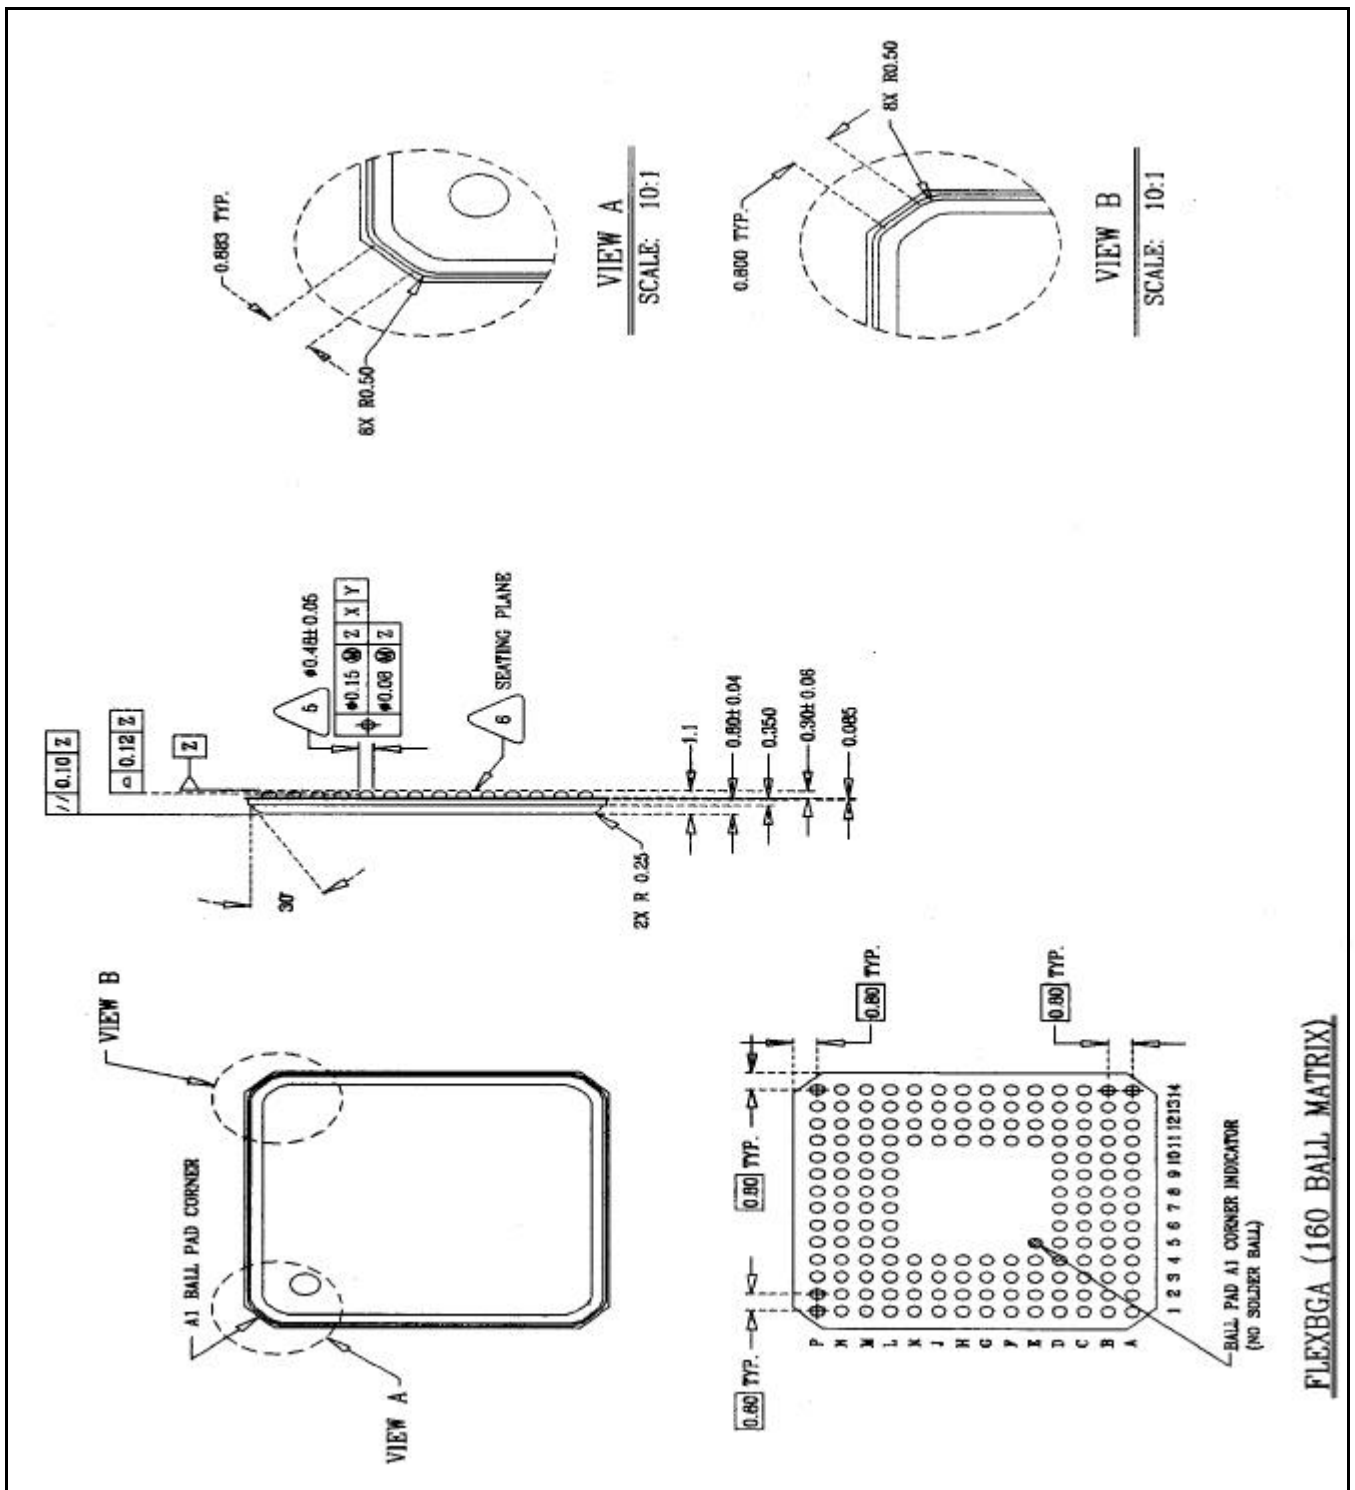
160-FBGA-12.0x12.0 Package Dimensions 2
